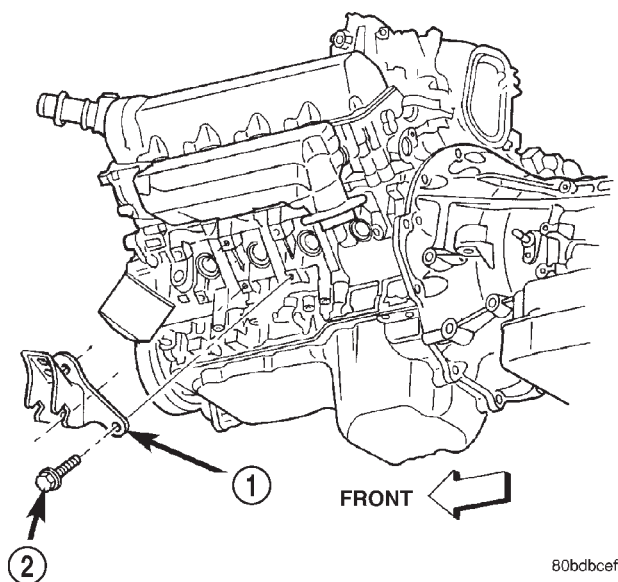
Engine Insulator Mount 4x4 Vehicle—Left Side
